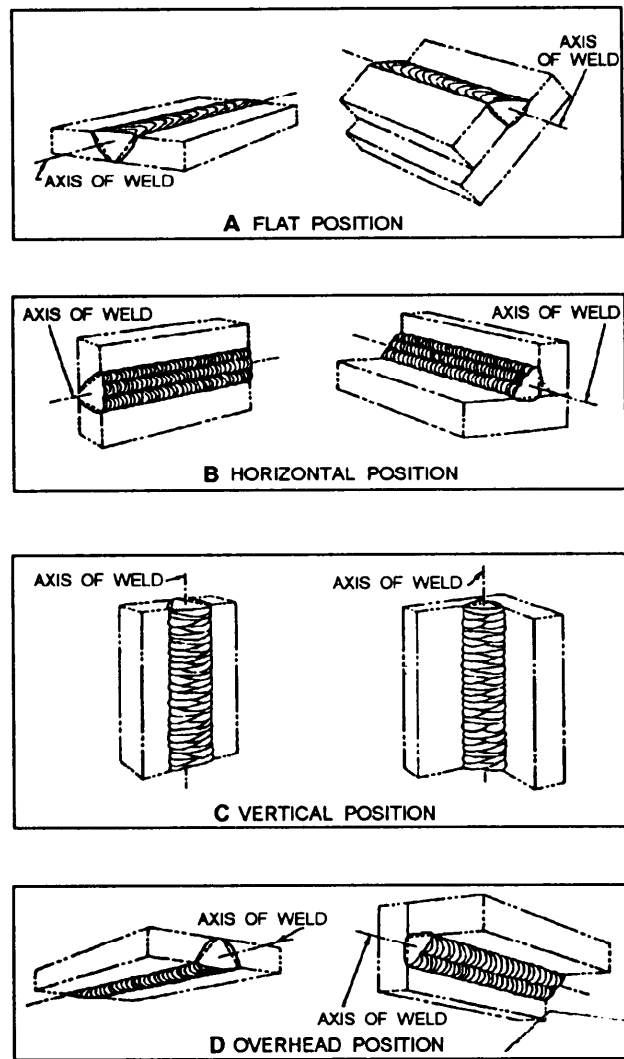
Flat, horizontal, vertical, and overhead positions for welding.
